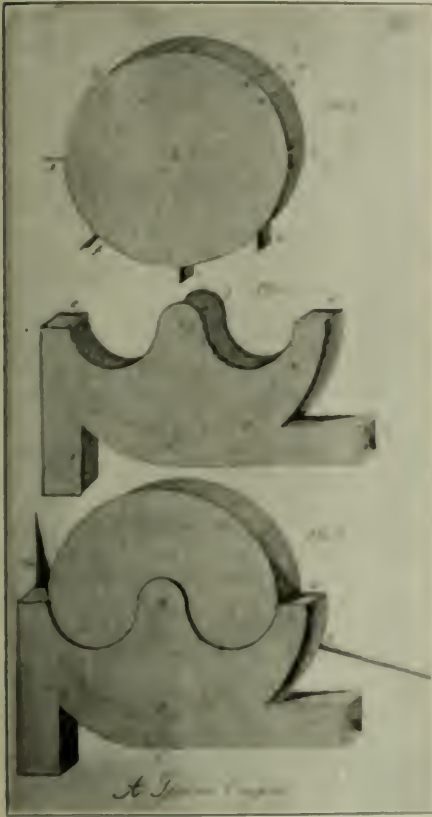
COOKE'S ROTARY STEAM ENGINE
